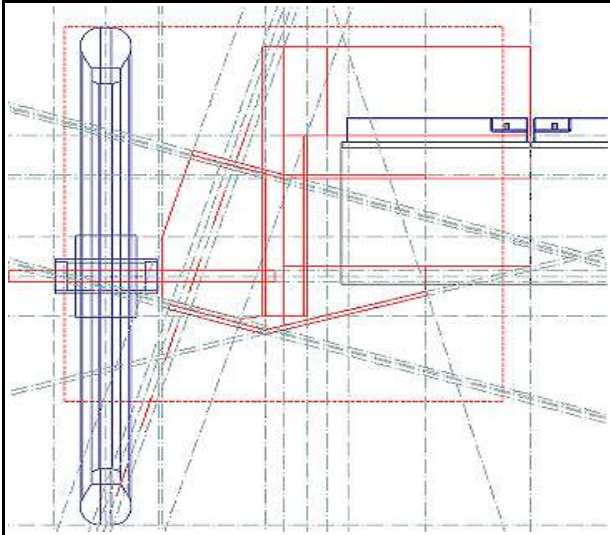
, A typical designer's eye view of the work in progress – front elevation constructing the front wheel supports.
